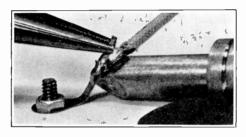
Method of unsoldering a permanent hook joint on a soldered lug. Spread open the hook with long-nose pliers while keeping the solder molten by holding the soldering iron under the lug.
